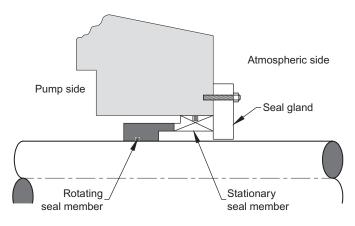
Schematic diagram of internal mechanical seal assembly.
